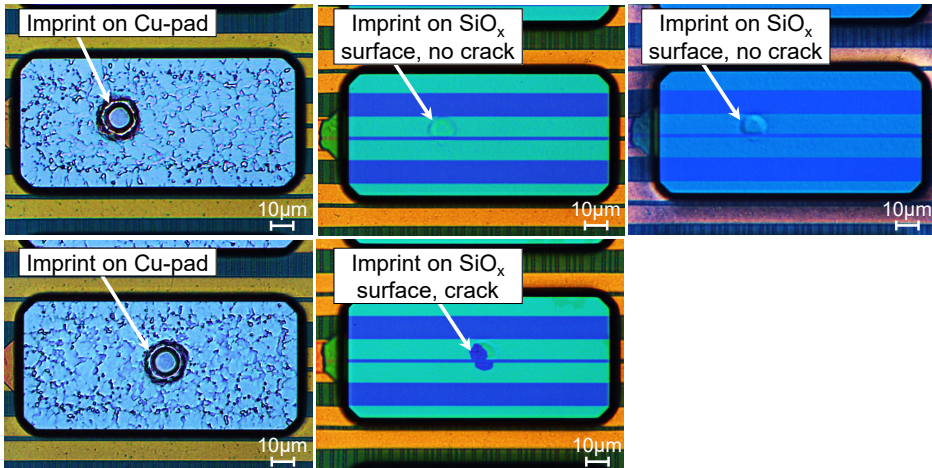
Optical imprint and crack inspection after contacting Cu-pads of variant 383 without (top) and with (bottom) oxide cracks.
